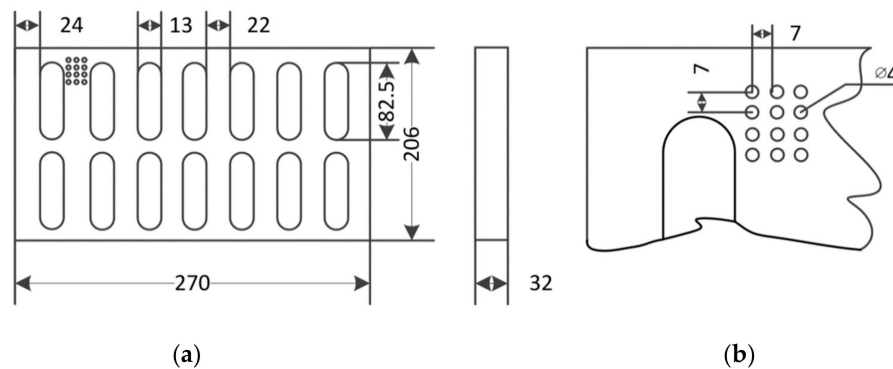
Dimension and hole layout of the CGI plate (Unit: mm). (a) The dimension of the CGI plates, and (b) holes layout.
